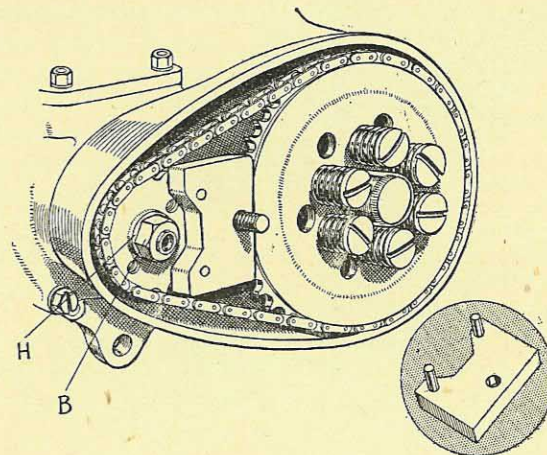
REMOVAL OF ENGINE-SPROCKET NUT.
